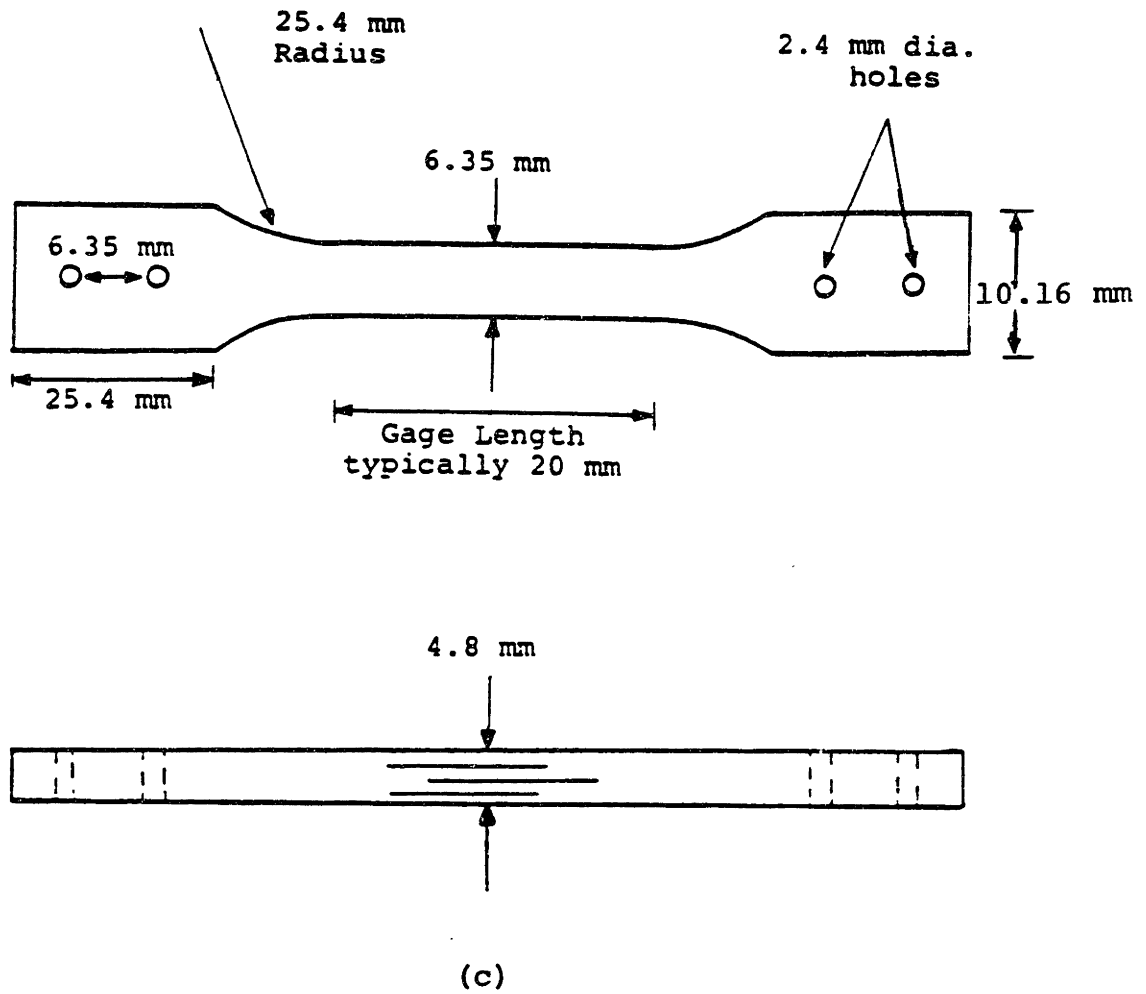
c) Width-tapered specimen for room and elevated tensile test of multi-directional laminates.
